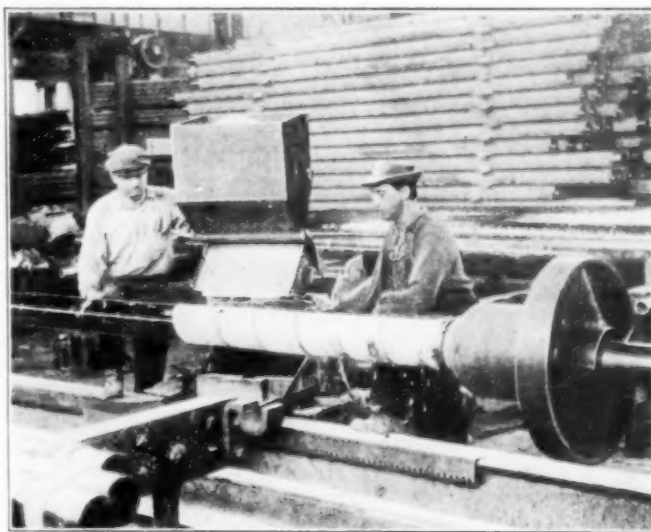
MACHINE FOR WRAPPING PIPE SPIRALLY WITH FABRIC AFTER APPLICATION OF HOT BITUMINOUS COATING
